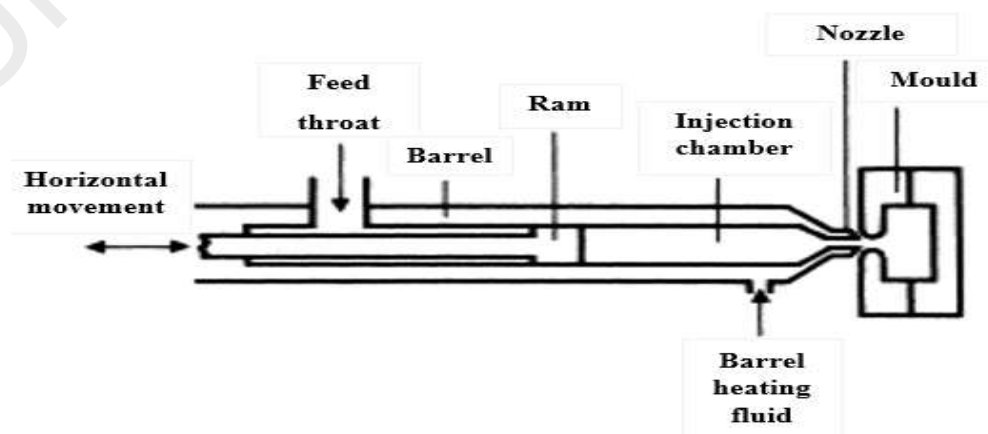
The ram type of rubber injection moulding machine. Schematic diagram from A.I. Isayev (1989).
